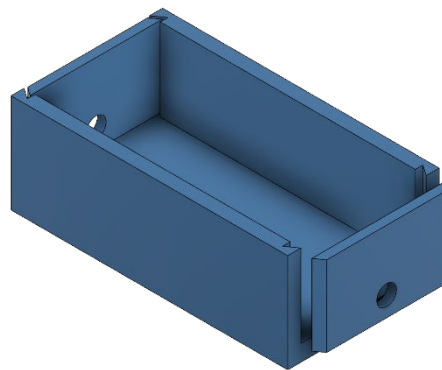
Tissue phantom mould 3D print design. Removable sides were incorporated so that the cured tissue phantom could be removed without damaging the vessel, allowing a single mould to be reused to make multiple phantoms. The sides are also interchangeable to adjust vessel depth or diameter.
